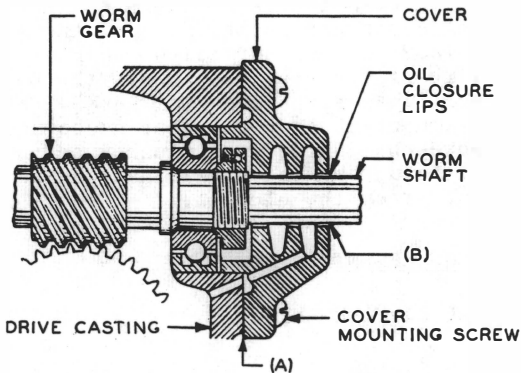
Sealed Joints and Oil Closures (All Drives Except No. 31A Drive)
